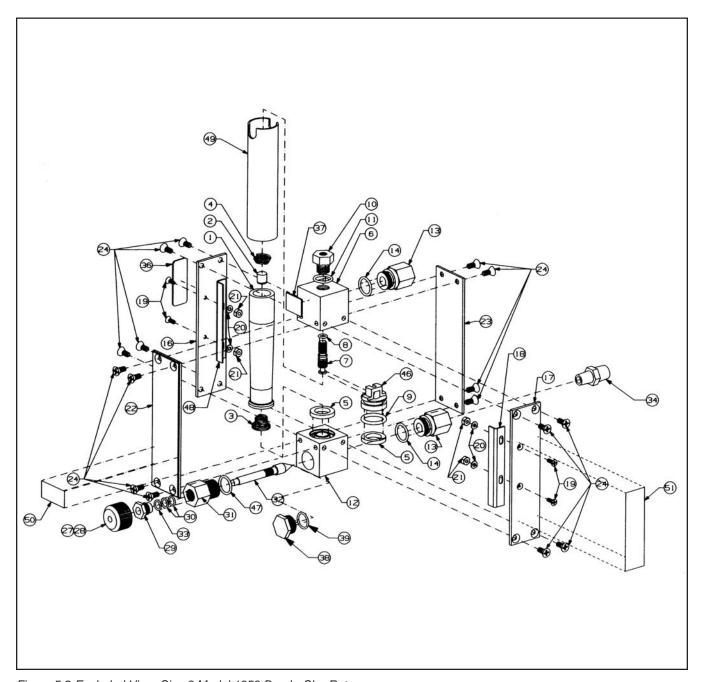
Exploded View, Size 8 Model 1358 Brooks Sho-Rate
